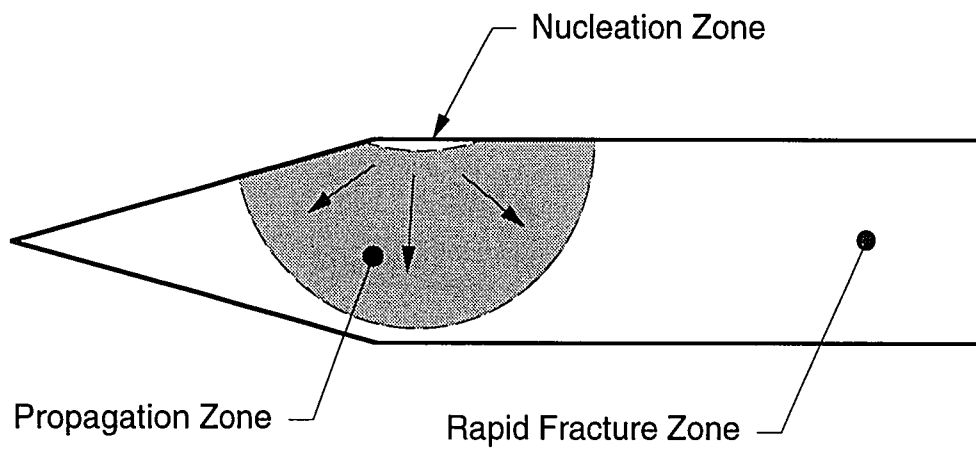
Diagram illustrating the three-zone fracture surface morphology of specimens thermally cycled in air to 900°C.
